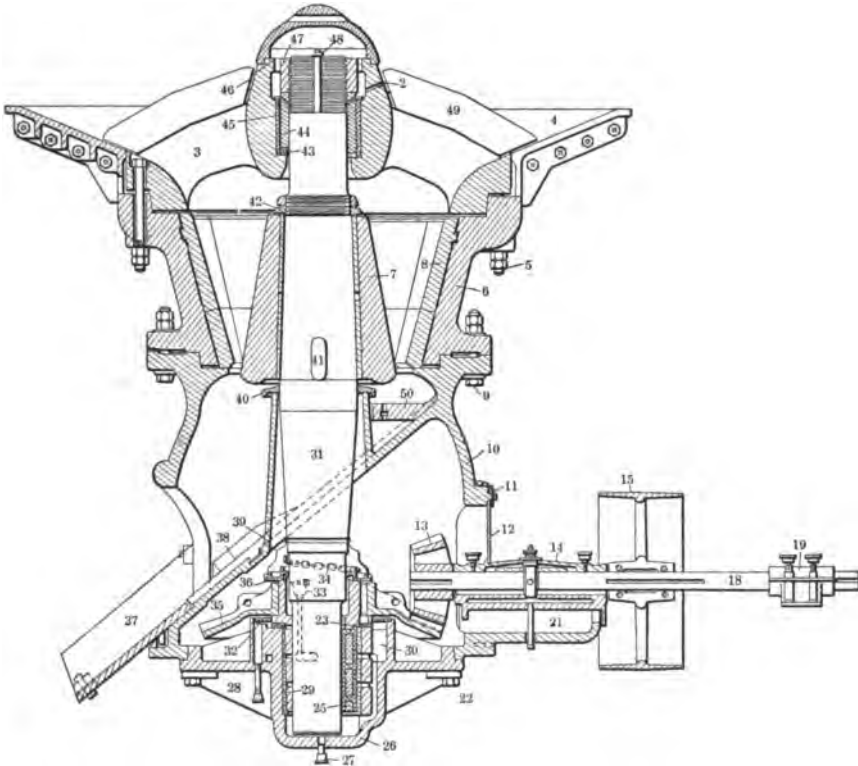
SECTIONAL VIEW OF GYRATORY BREAKERS.
